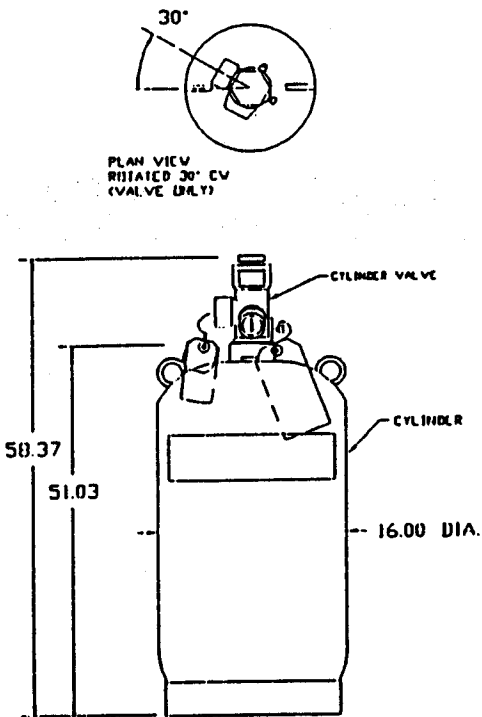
Halon 1301 Cylinder/Valve Assembly, 350 lb., without Liquid Level Indicator
